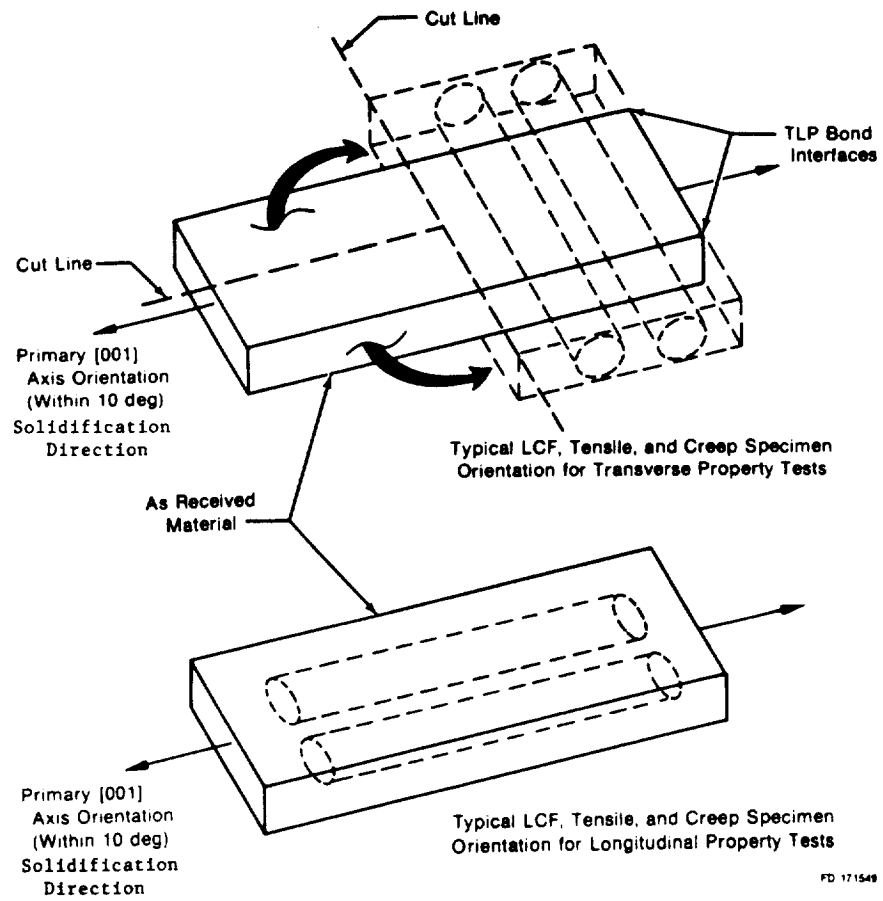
TYPICAL SPECIMEN TEST BLANK FABRICATION AND BONDING SCHEMATIC
